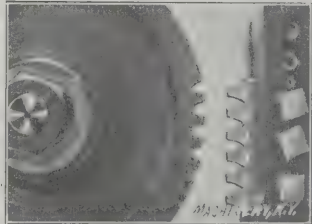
Fourth Position: Blank withdrawn from the Cutter
